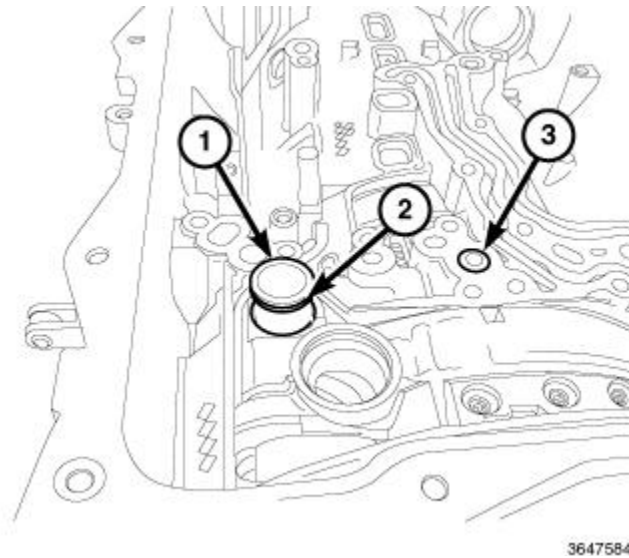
Fluid Port, Two O-Rings, Compression Seal
